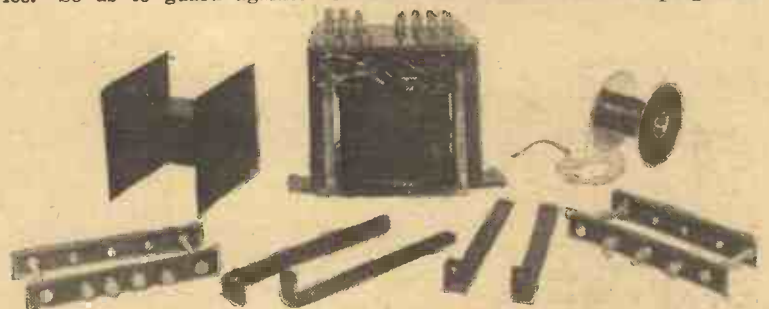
Another set of parts for a mains transformer including angle clamps, clamping bolts, and terminal strips.
